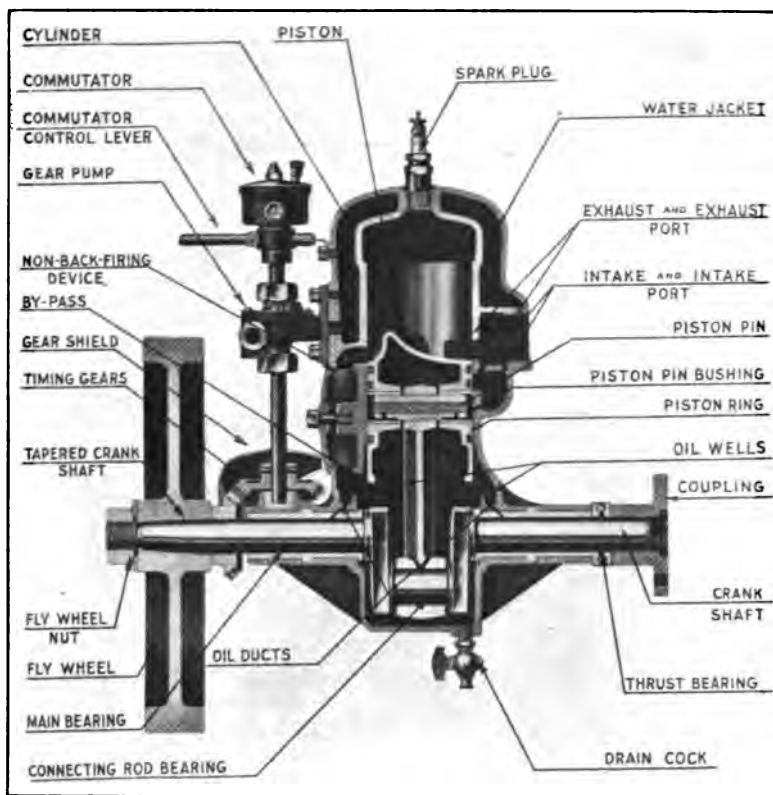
Part sectional view showing arrangement of ports in the Gray Model U marine motor.
